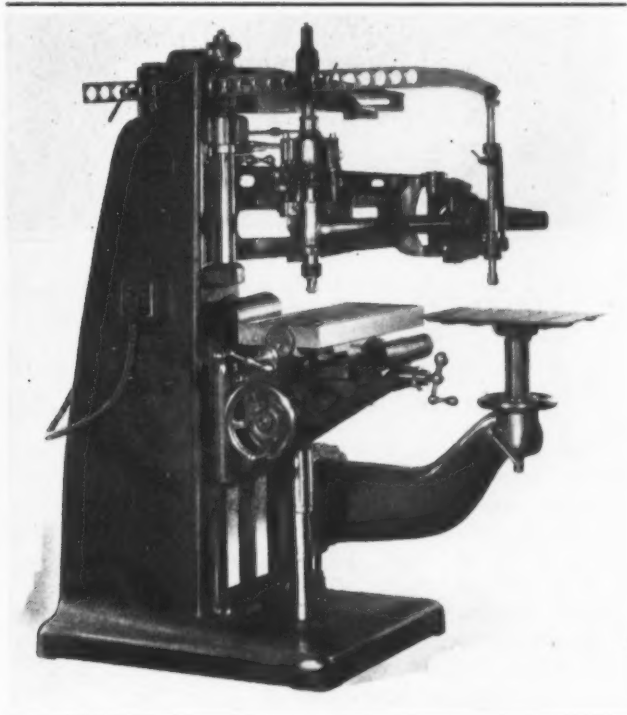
Gorton Medium Size Three-dimensional Machine for Engraving and Die Work
